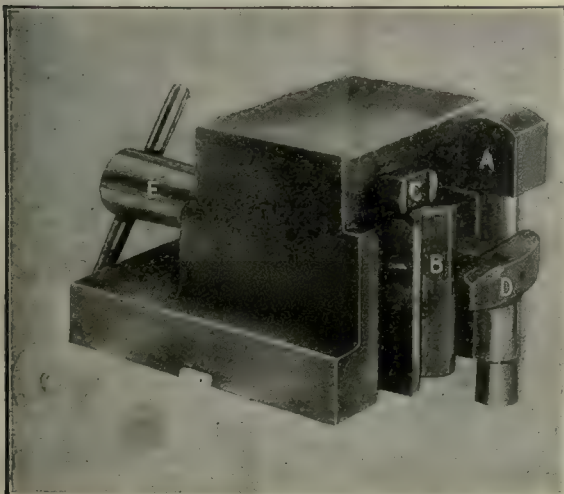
GRINDING FLAT FACE ON VALVE PLUNGER
